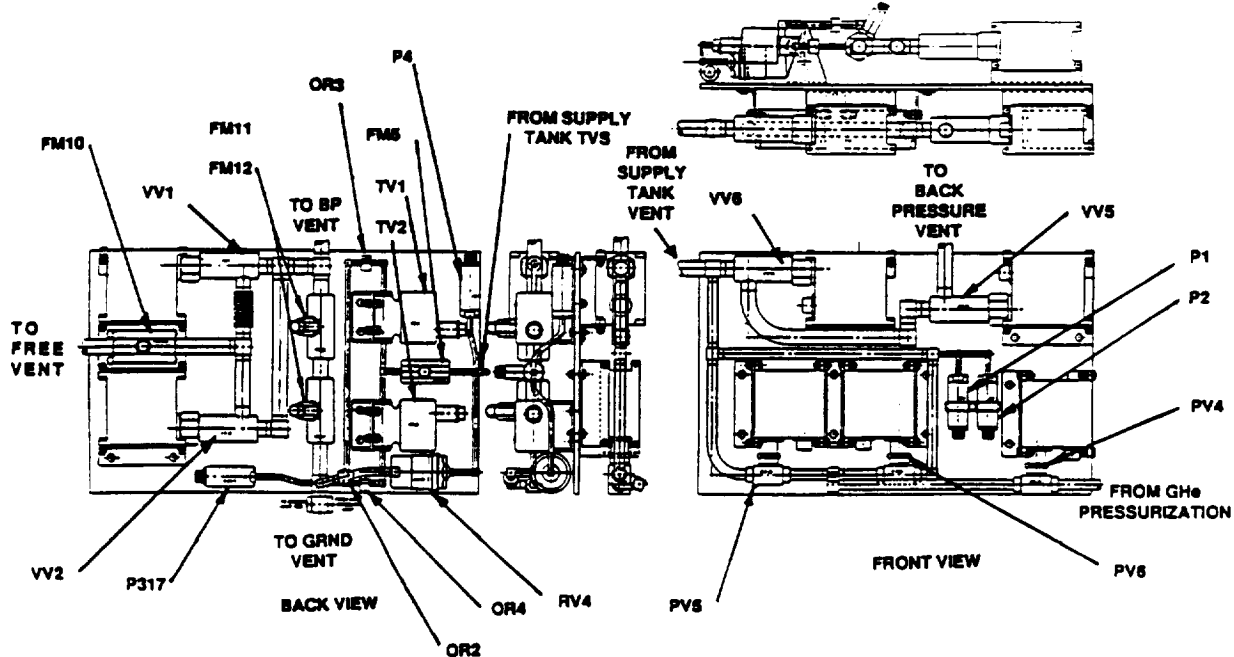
Valve Panel 2 Equipment Design Configuration
